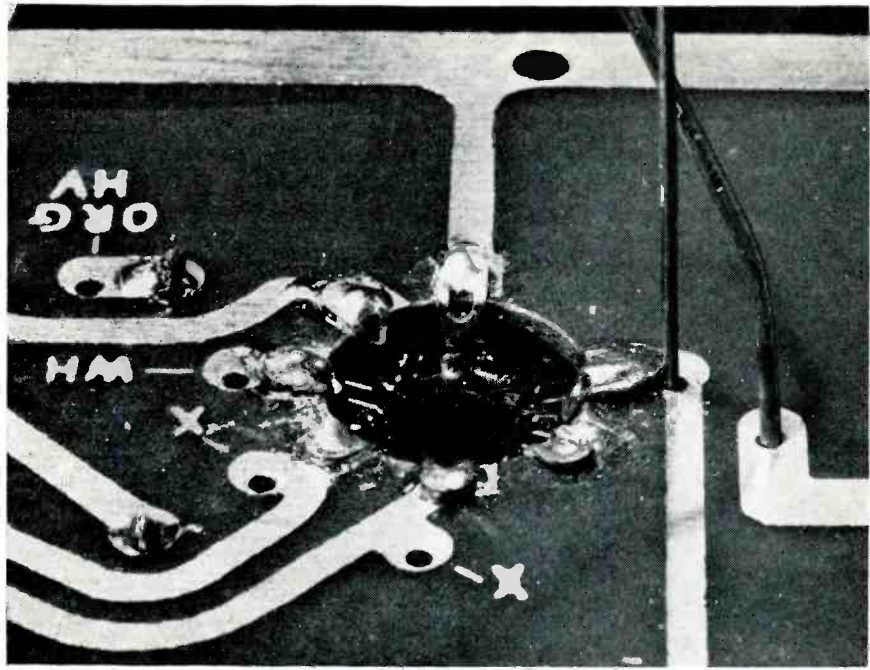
Tube socket connections on PC board. Some solder joints are good, some bad.
